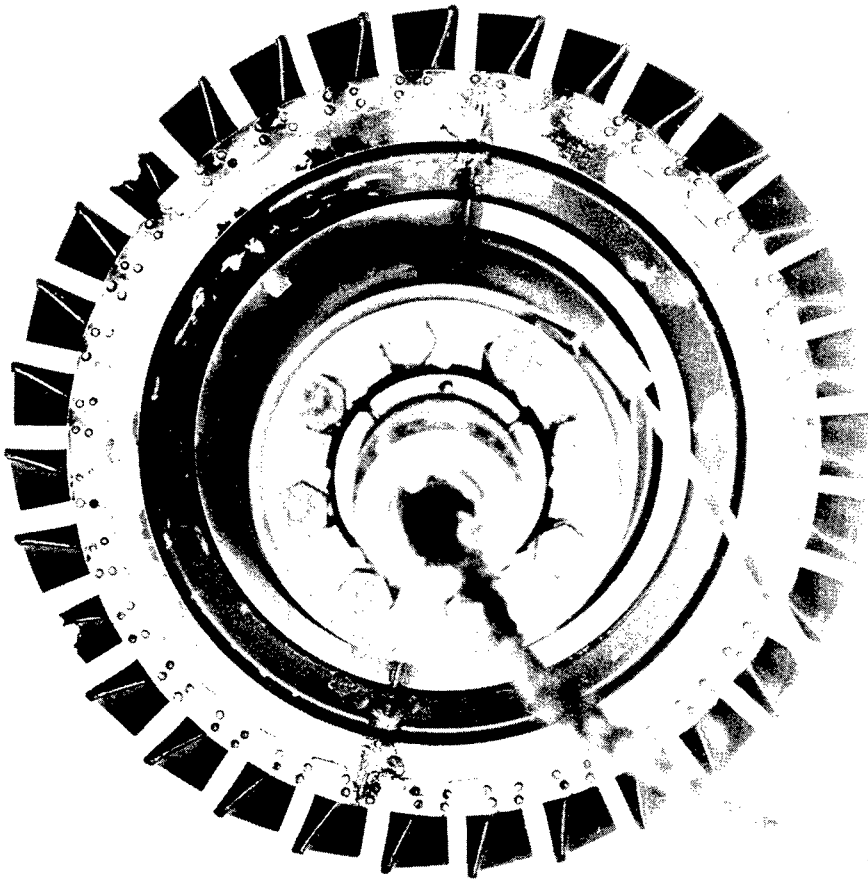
Turbine Rotor Assembly - After Run No. 62.
